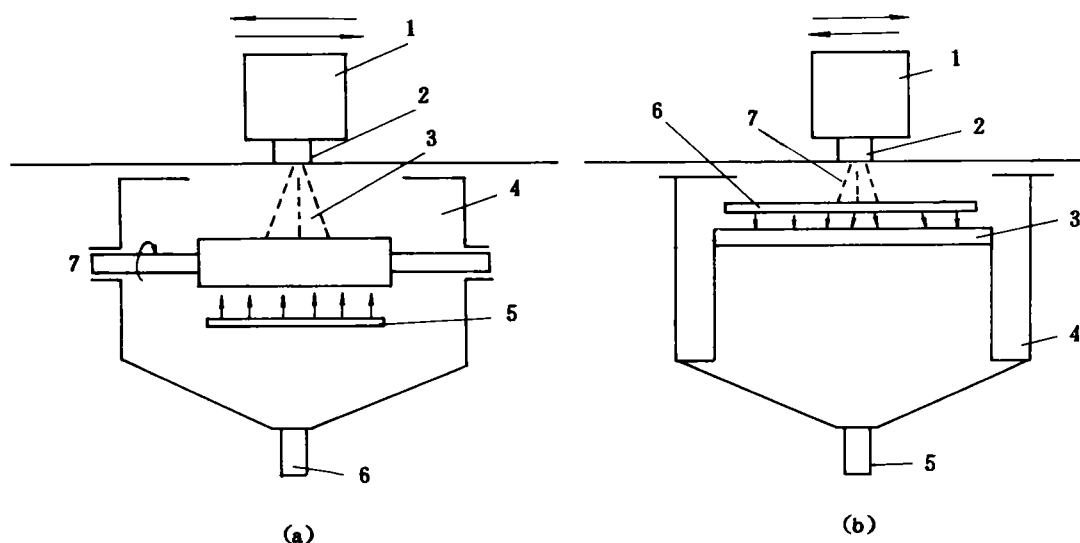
The schematic diagram of the novel spray deposition technology for manufacturing pipe blanks (a) and plate blanks (b)
